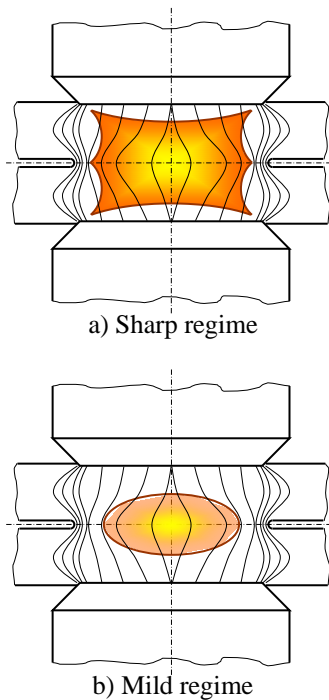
Influence of welding regimes on dimensions and shape of welded spot [1]
